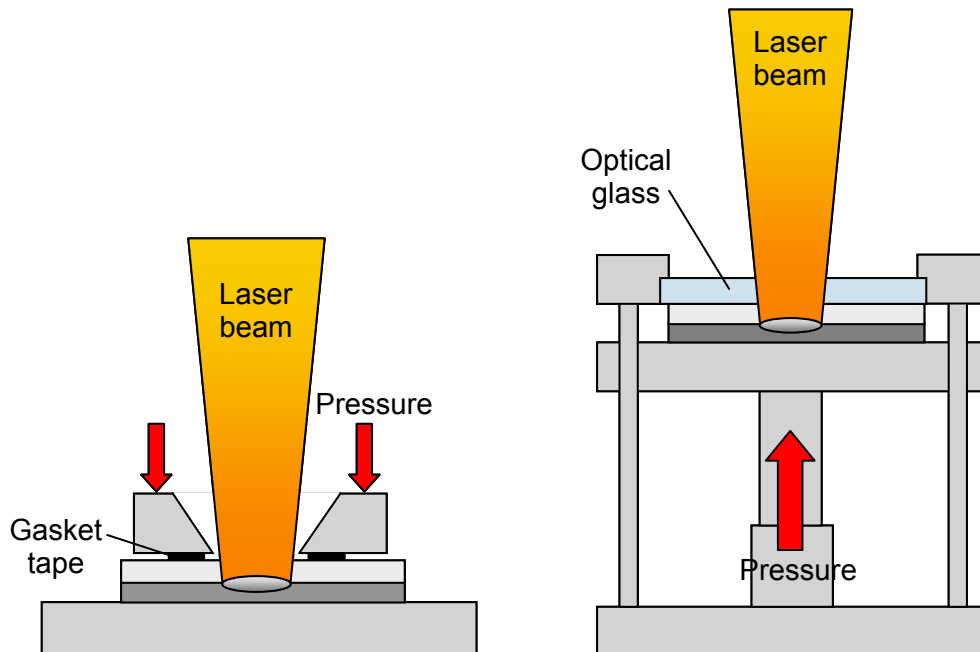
A schematic drawing of the clamping devices used in the welding experiments.
